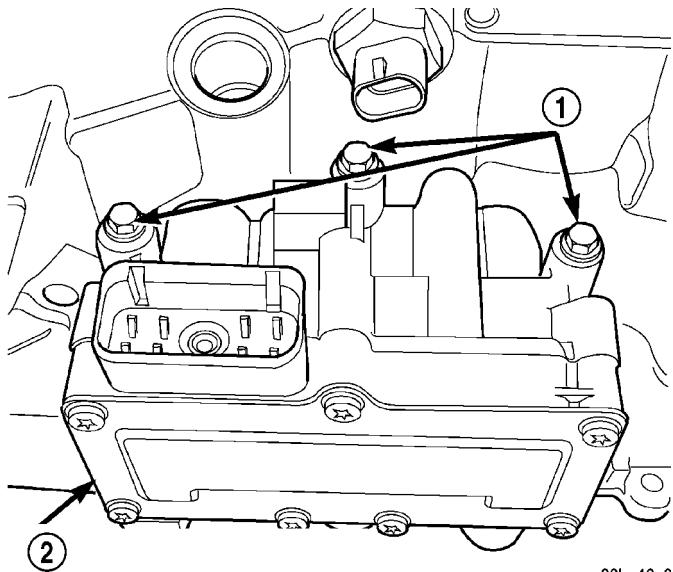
Solenoid/Pressure Switch Assembly and Gasket
